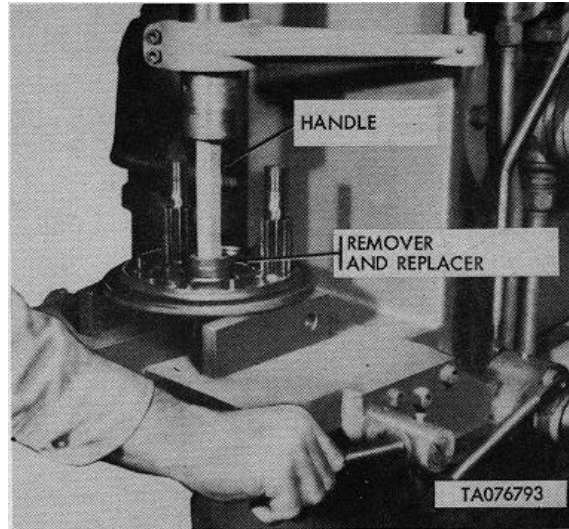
Axle Housing - Large Bushing Replacement Using Remover and Replacer with Handle
